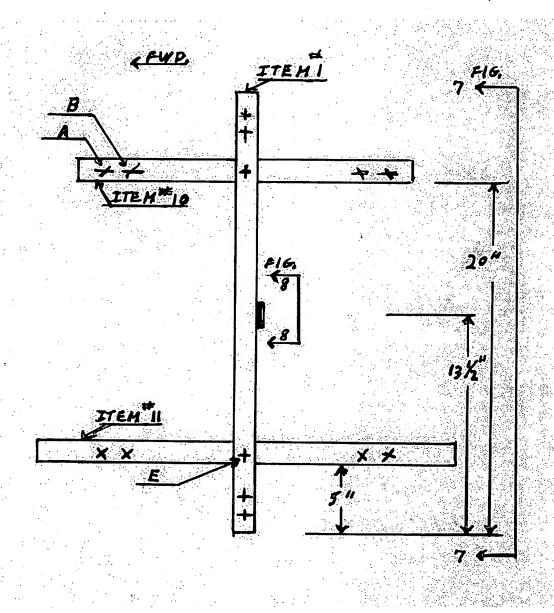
Drive Axle Unit Part # 857 / Part # 856
